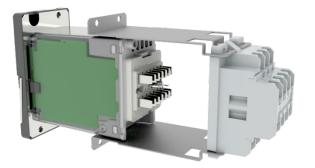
Panel mount with adapter unit with rear connection Terminal Block TBD-R2. Relay shown partially drawn out of panel. Note: The terminal block retention plates supplied with TBD-R2 mounting are not suitable for use with linear sensor.
